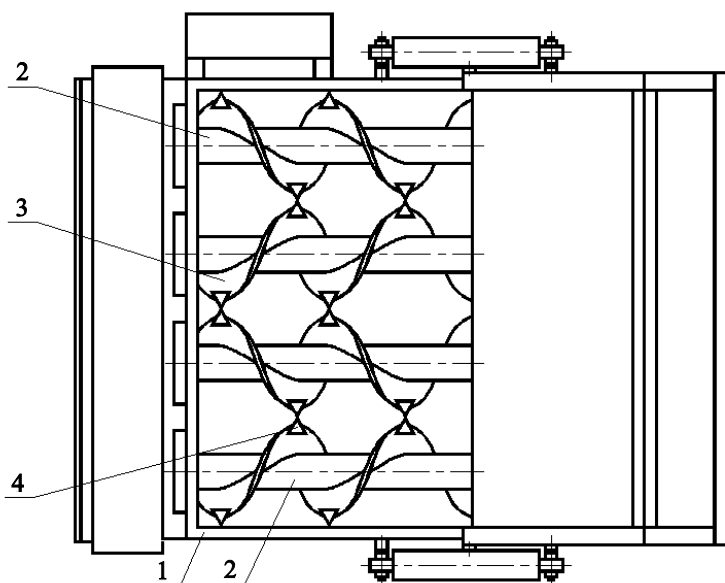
Recycling auger with cutting elements: 1 – casing; 2 – screw; 3 – screw winding; 4 – teeth [23]
